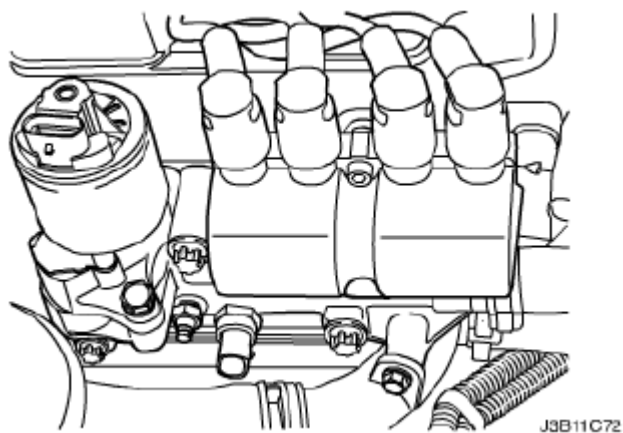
Identifying DIS Ignition Coil And EGR Mounting Bracket And Ignition Wires
